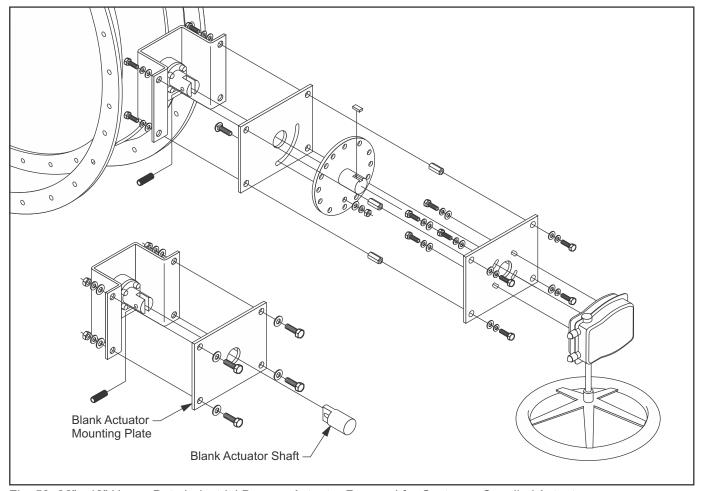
36" - 48" Heavy Duty Industrial Damper Actuator Removal for Customer Supplied Actuator.
